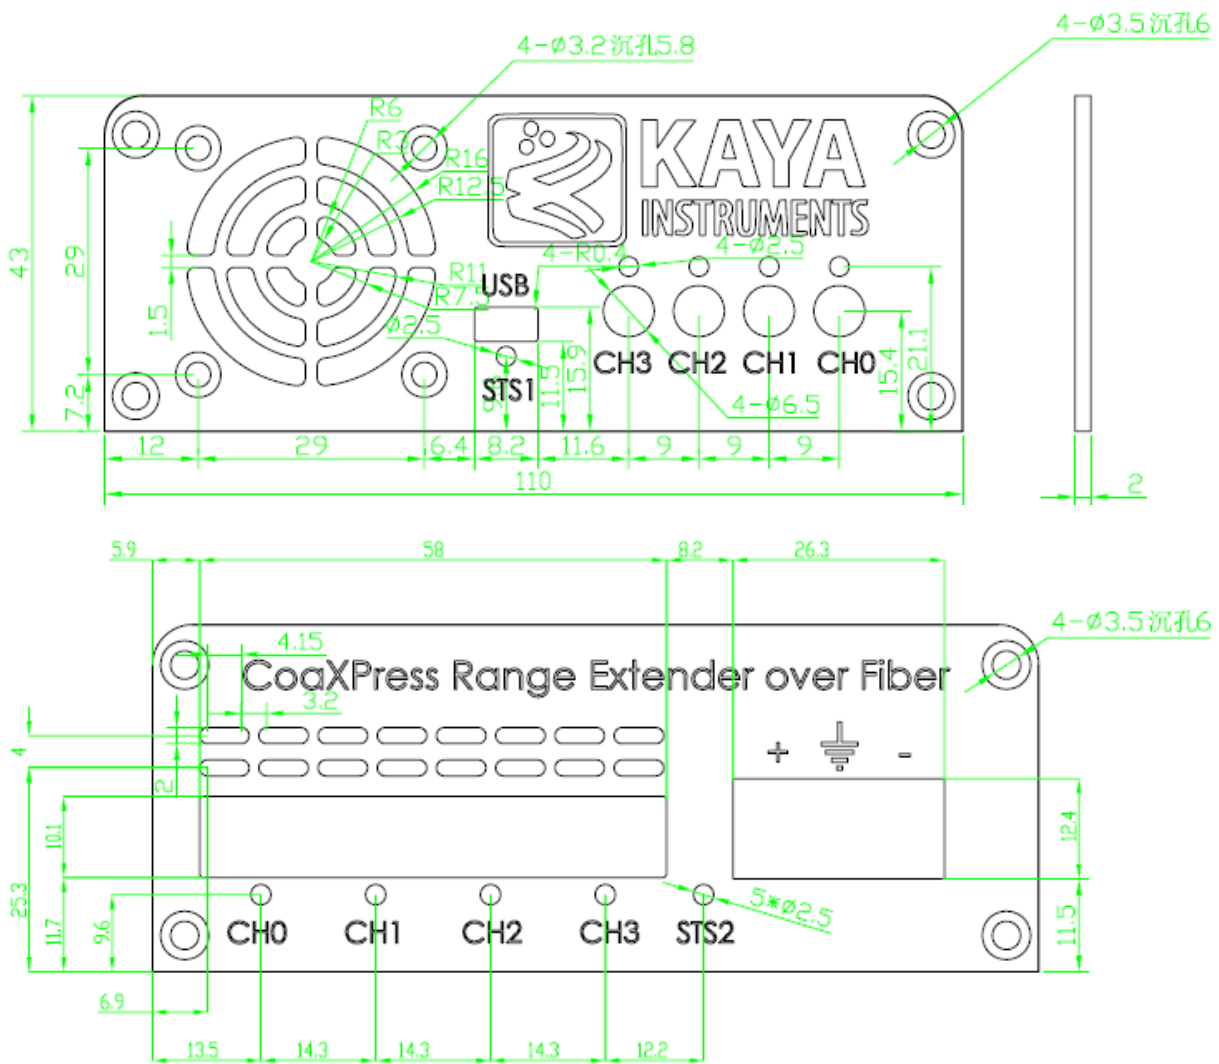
External dimensions of the KY-FEXT unit front and rear panel
